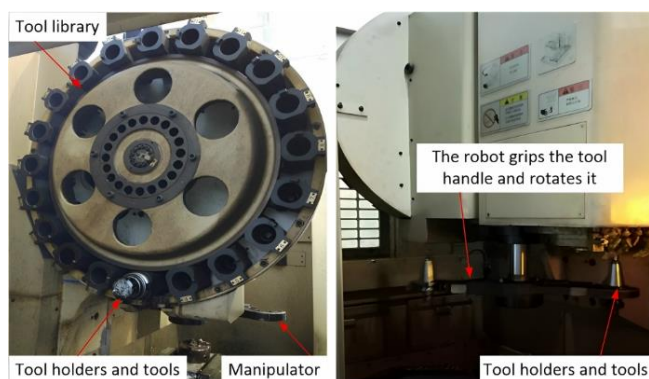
Application of robots in the vertical machining centre tool changer [92]
